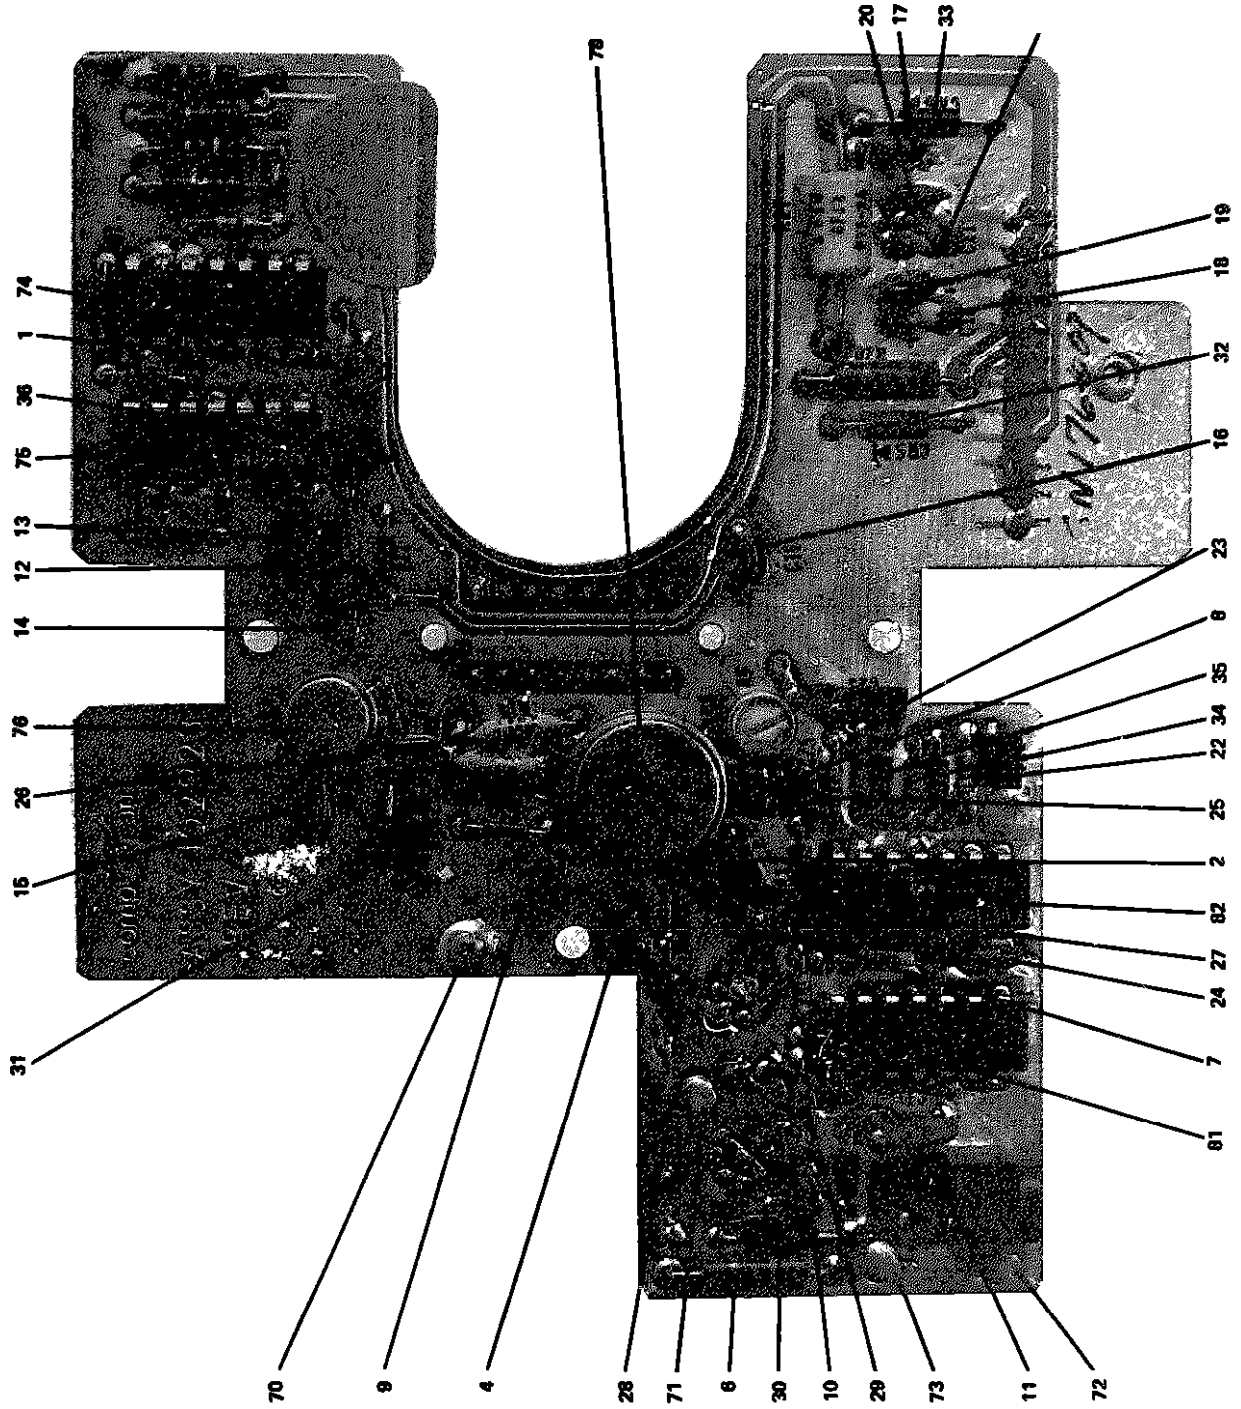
Read Head Circuit Card Assembly 1A7A2A2A1 (sheet 1 of 3)
